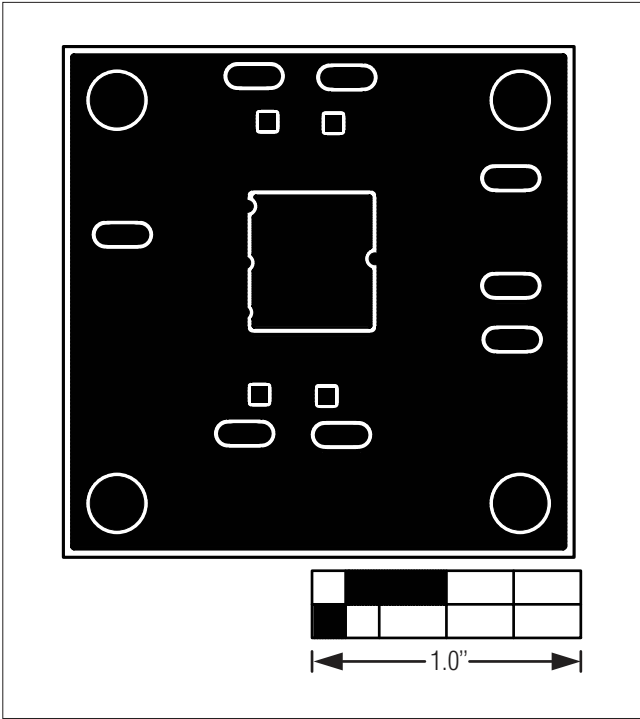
MAX9633 EV Kit PCB Layout—Solder Side
